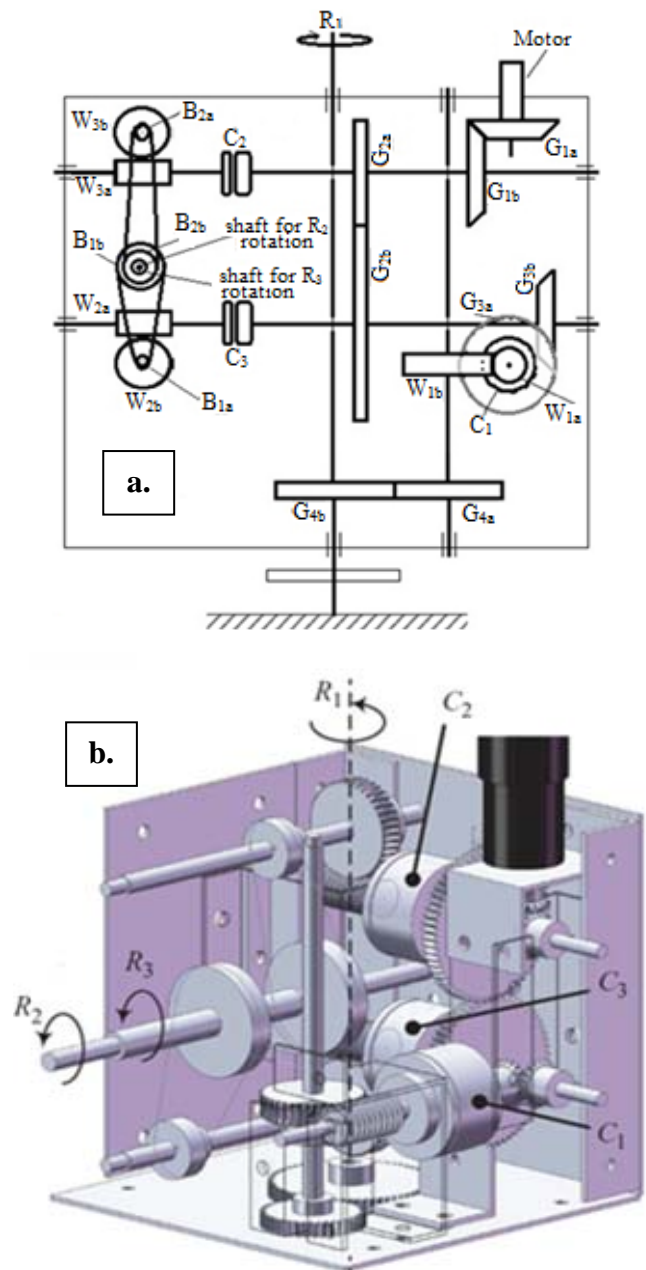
The mechanical shoulder design of LARM clutched arm; a) a kinematic scheme, b) a CAD model.
